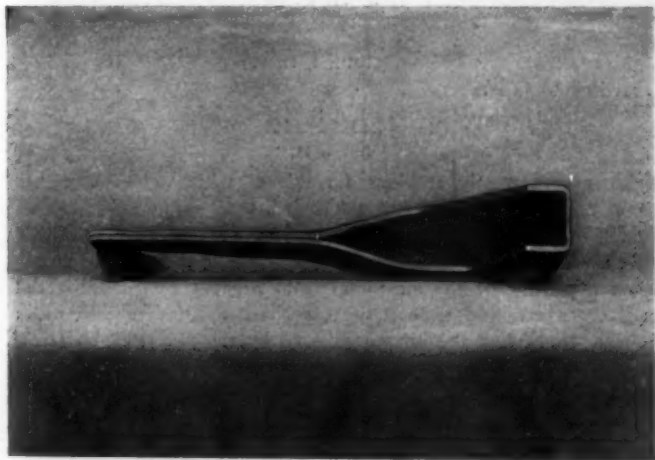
C-46-O Krupp steel chassis frame cross member. Physical properties: T. S., 114,645; E. L., 93,167; Ex-2", 17%; cold bending test, 180° and flatten down without sign of fracture.
